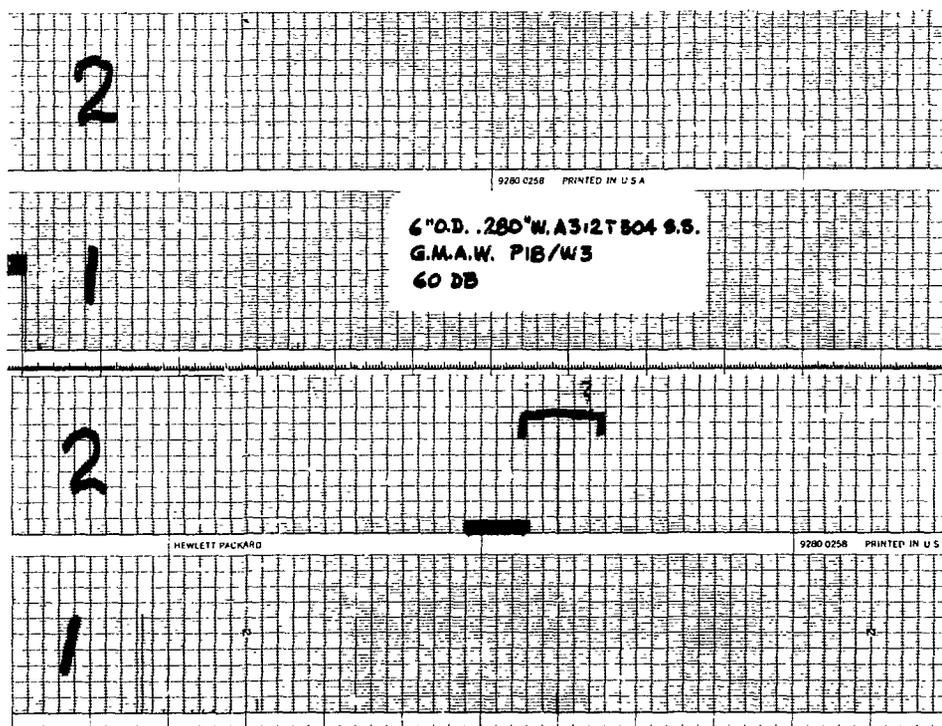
ACOUSTIC EMISSION RECORD FOR 152.4 mm OD A312T304 STAINLESS STEEL PIPE CALIBRATION TEST WELD
